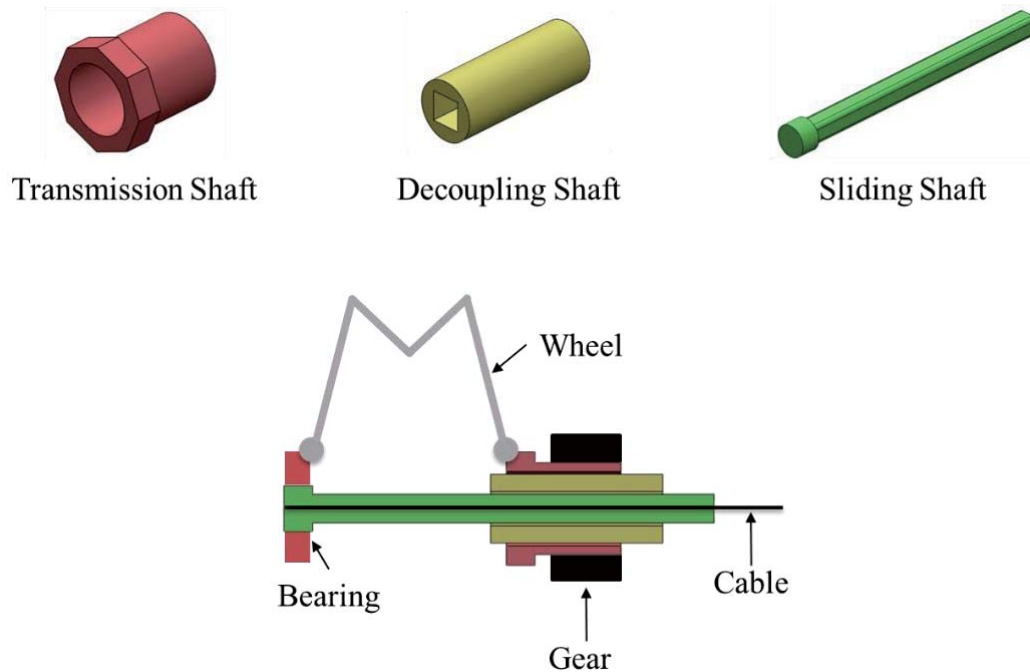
Multi shaft structure for cable twisting problem. The middle shaft decouple the sliding shaft and the torque transmission shaft.
